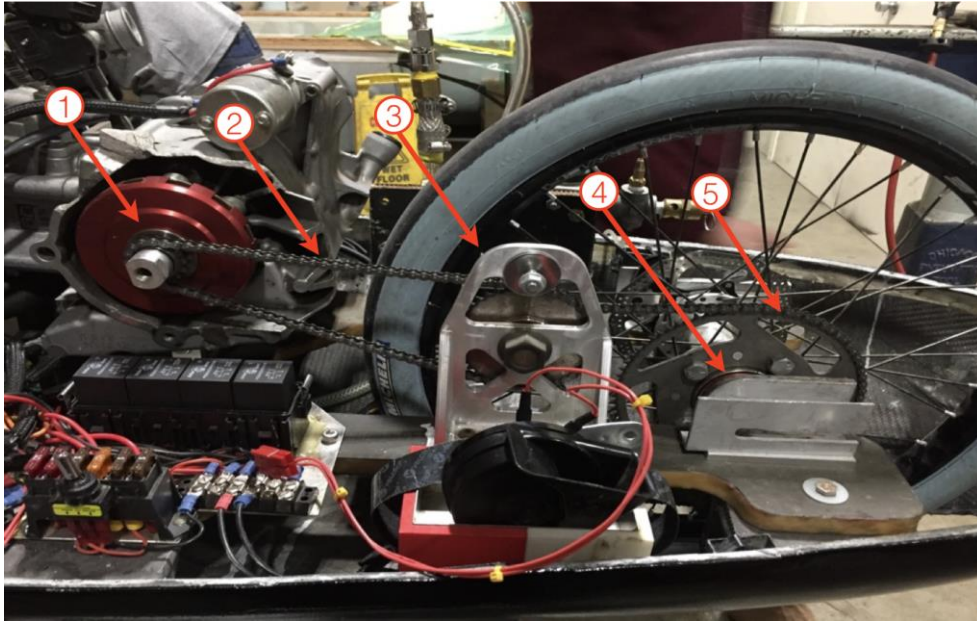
The 2017 SMV drivetrain showing the sprockets in the double stage reduction. The parts pictured include; 1) Vortex clutch, 2) #25 Chain 3) Jackshaft System with intermediate sprockets, 4) Freewheel, Hub, and Adapter, 5) Rear sprocket
